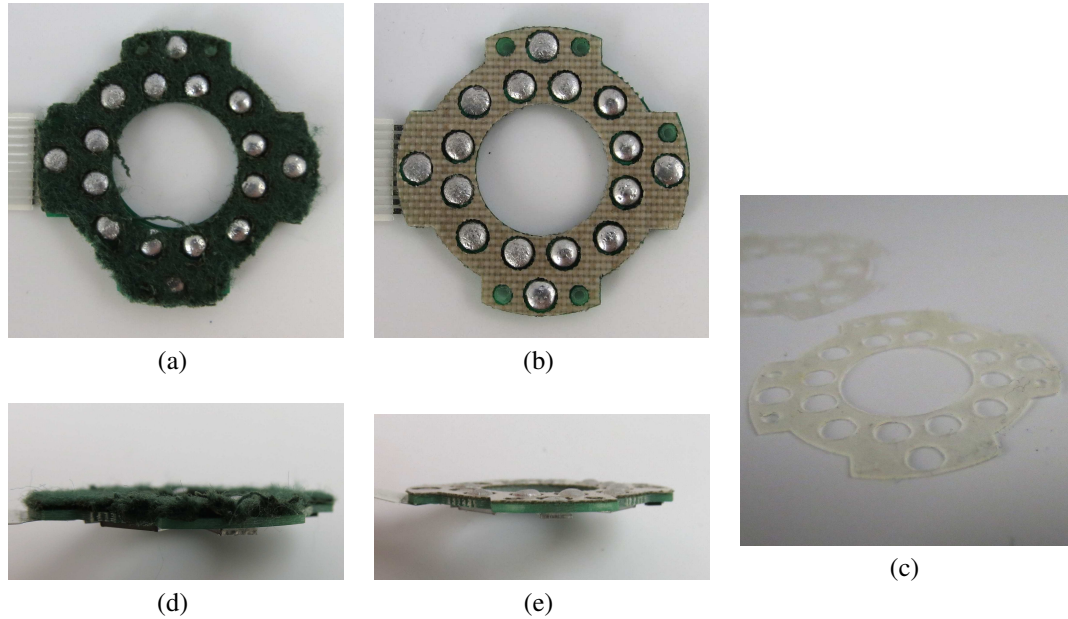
Soldering connector spacer implementations. (a) and (c): Adhesive laser cut felt, (b) and (d): Silicon-adhesive laser cut fiberglass film, (c) 3D-printed.
